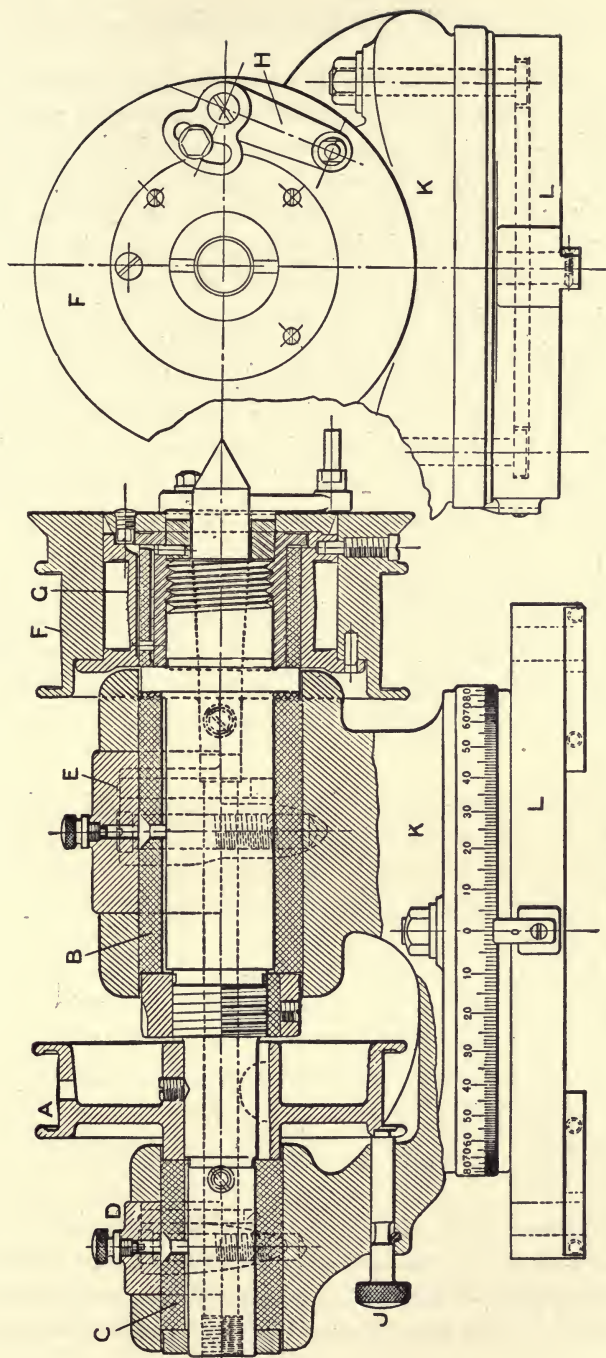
WORK HEAD OF UNIVERSAL GRINDER—BROWN & SHARPE
